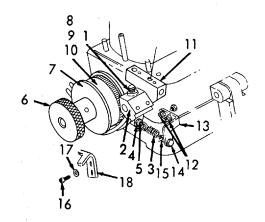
Belt Finger Holder and Cushion Spring Removal.
